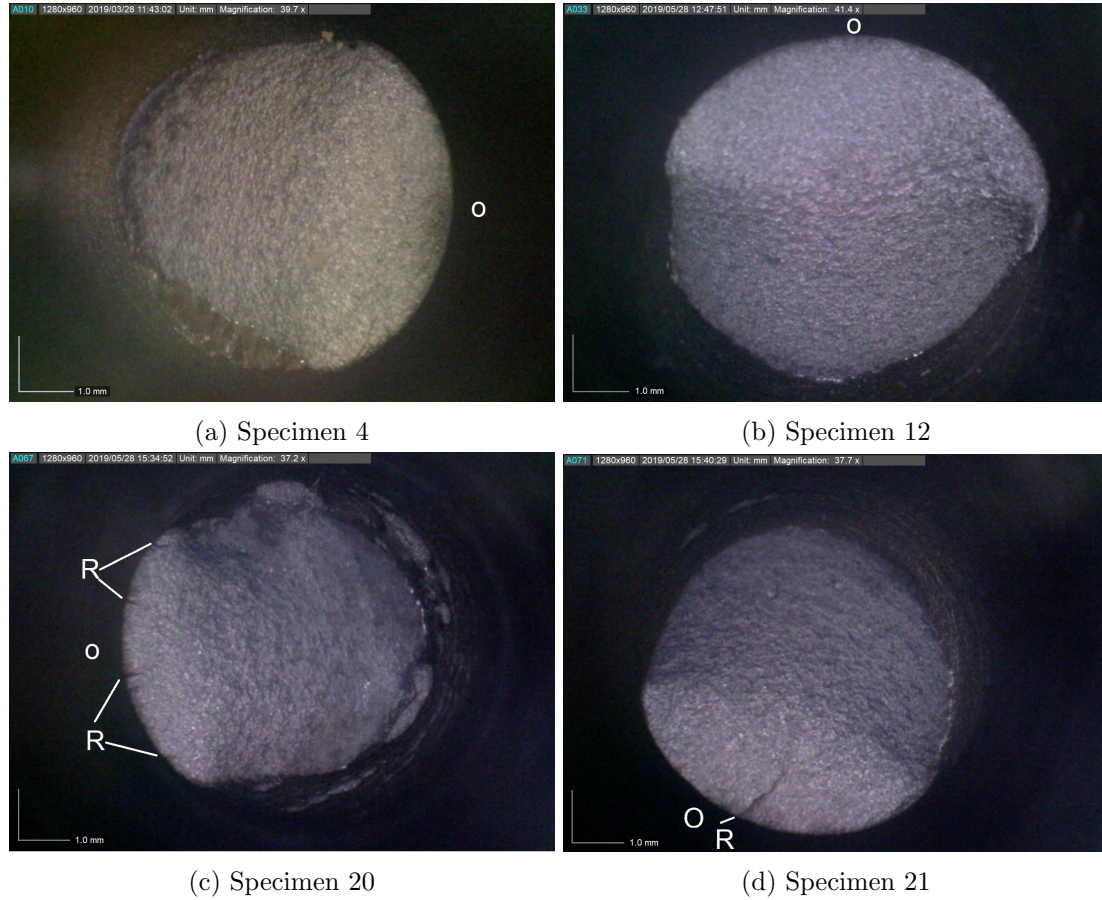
Fracture surface of specimens tested under axial loading for $R=0.01$
